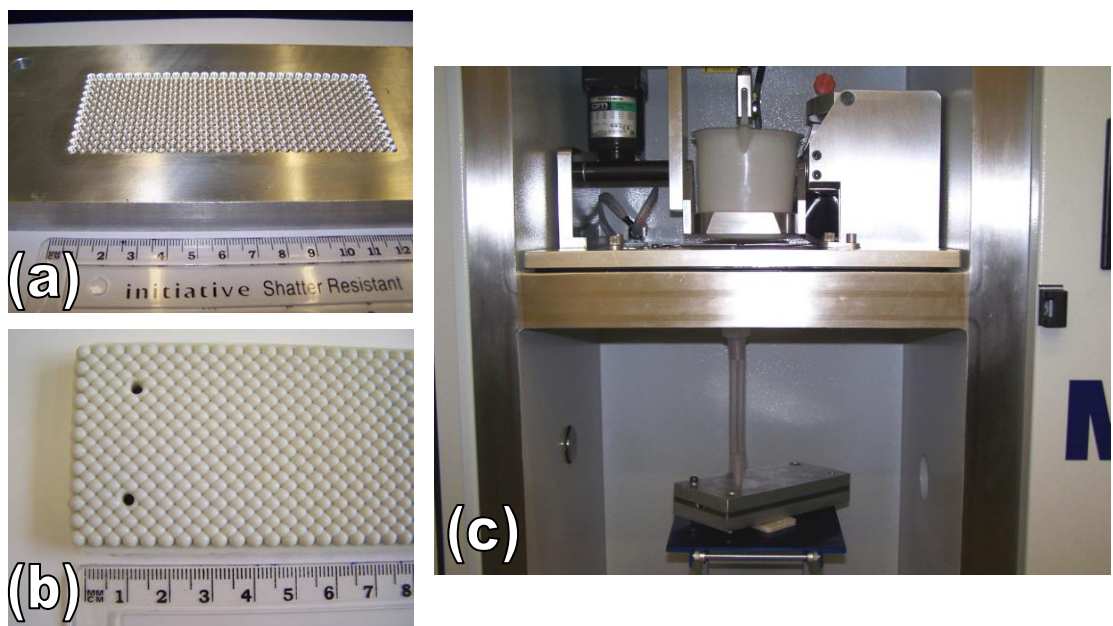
Aluminium mould plate for a textured rectangular sample (a), a 4mm intersecting square sample (b) and the mould in the vacuum casting machine (c).
